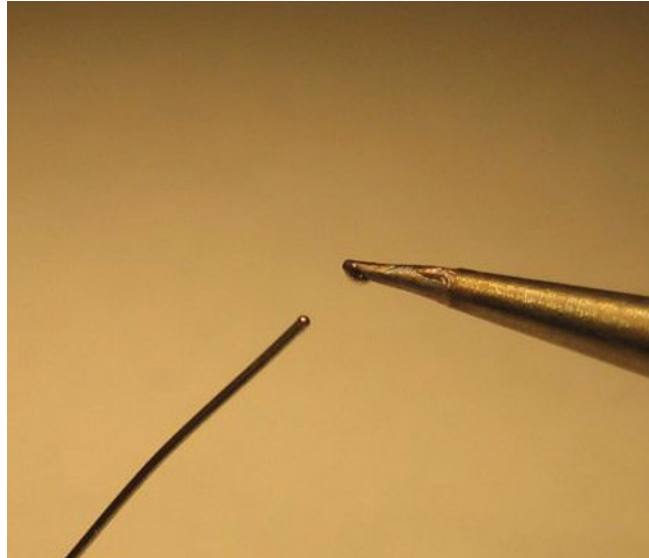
Small Amount of Solder Added to ZIF Tip of Soldering Iron
